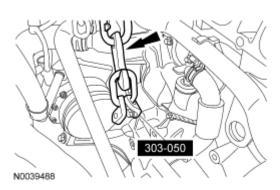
Identifying Special Tool (303-050) Courtesy of FORD MOTOR CO.
